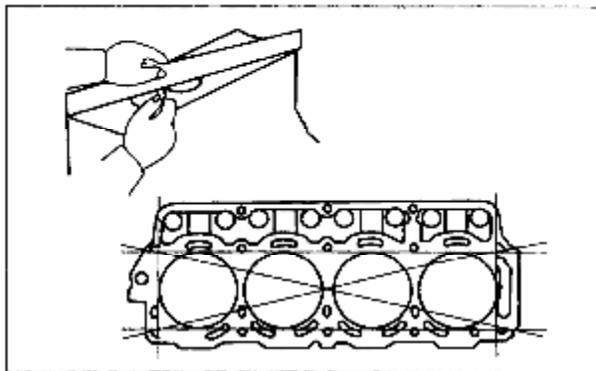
Check Warpage on Top deck of Cylinder Block
